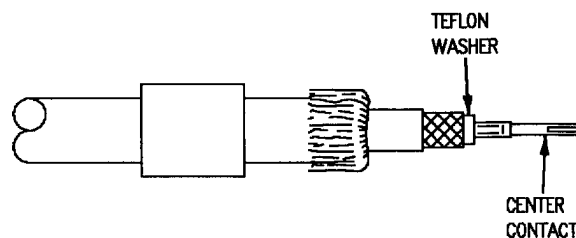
902-5019-2 Triaxial Assembly Procedure (Sheet 1)
